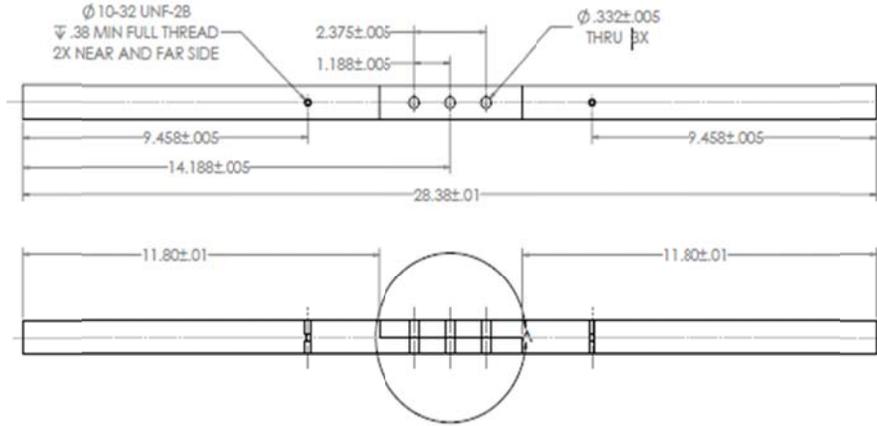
Dimensions of the round robin beam (dimensions given in inches).
